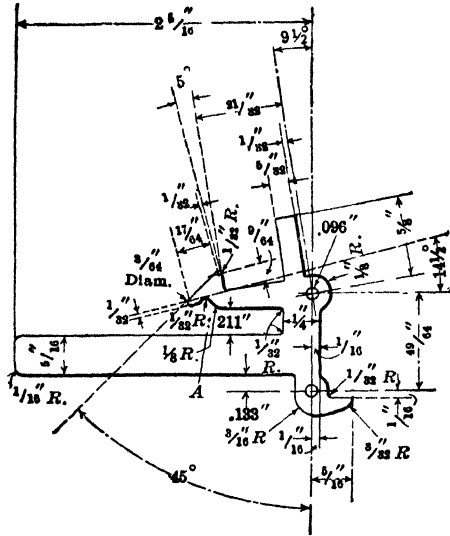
Detail of blank produced in the tools in Fig. 121.
